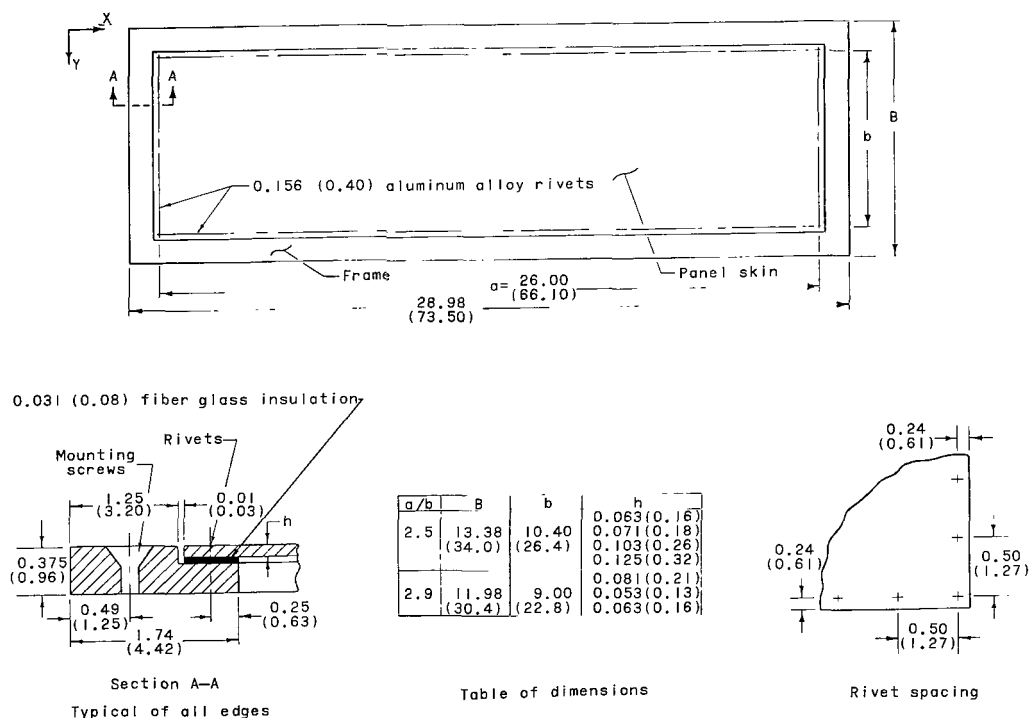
Panel construction details (typical of all panels). All dimensions are in inches (cm).
